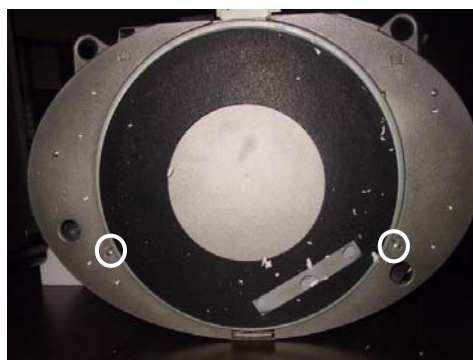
SCREWS SECURING JOYSTICK ASSEMBLY TO BASE
